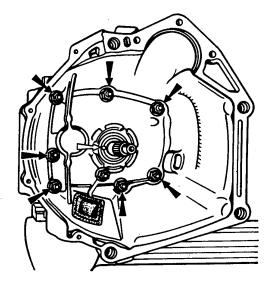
Clutch Housing, Inside View. Black arrows show housing-to-gearbox nuts. White arrow shows hole in front cover for draining oil from gearbox housing to prevent oiling of clutch discs
